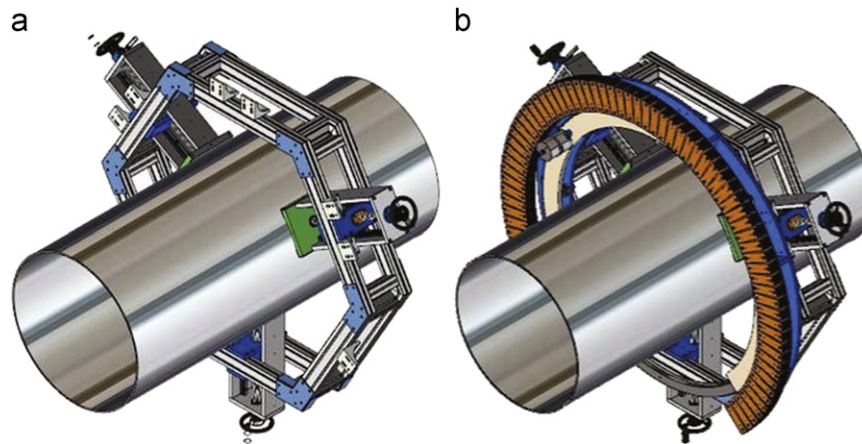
Cad drawing of the clamp-on portable gamma-ray tomographic scanner: (a) clamping device and (b) tomographic scanner with clamping device.
